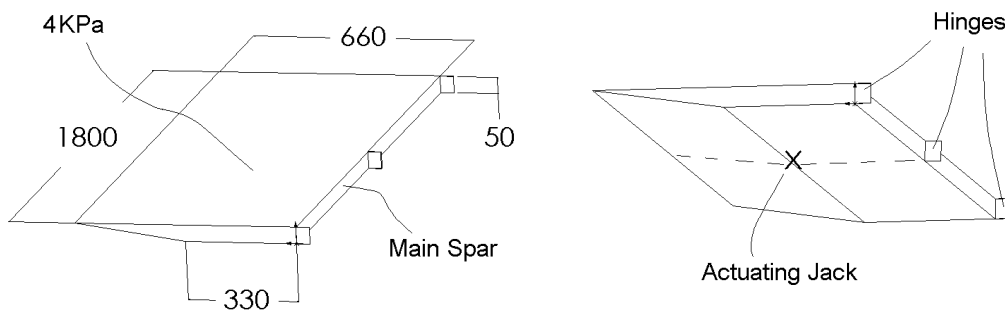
, Spoiler design envelope; top view (left), bottom view (right).
